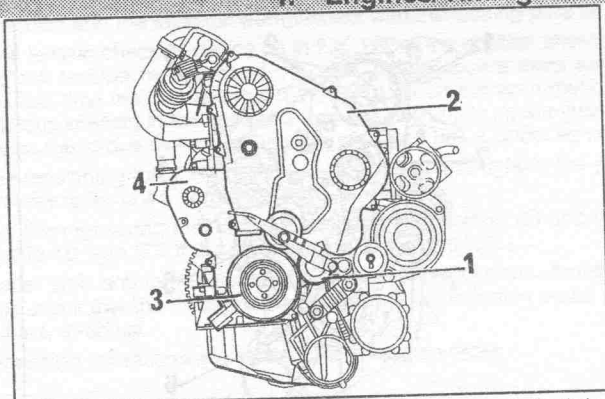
The parts 1 to 4 must be removed before access to the timing belt is possible (see text).
